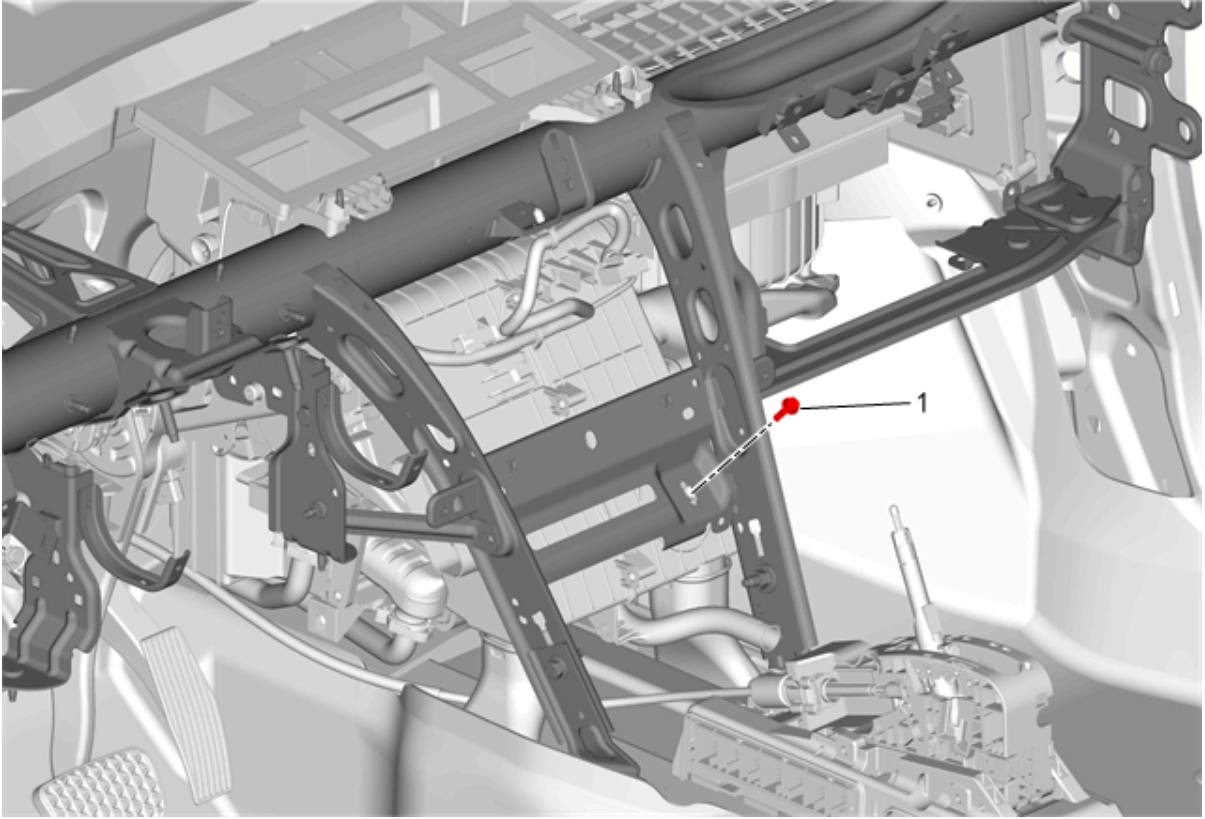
Heater and Air Conditioning Evaporator Module Bolt
